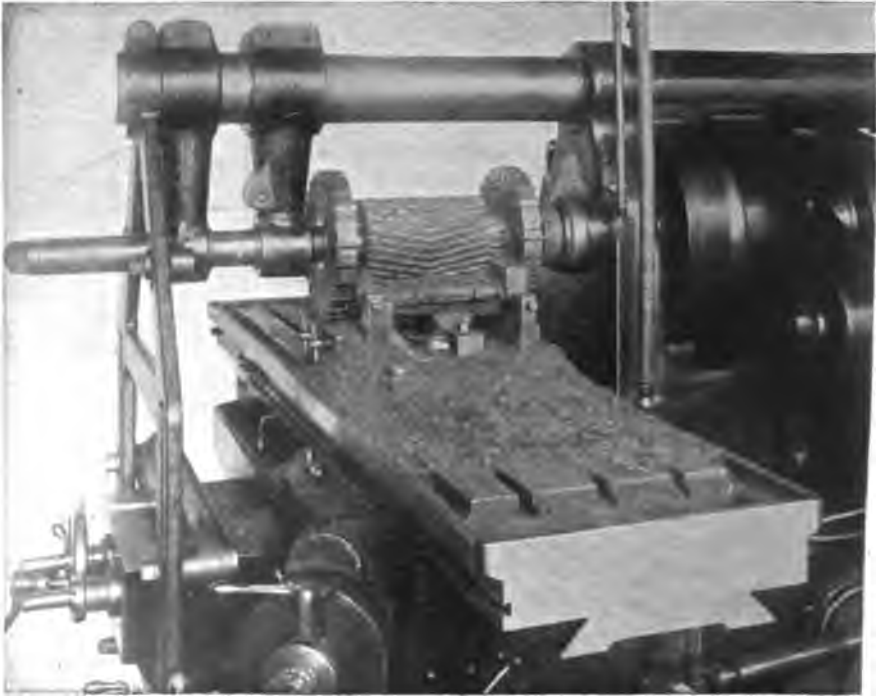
The gang milling cutter, built in sections in order to simplify problems of manufacture, hardening, grinding and maintenance.
